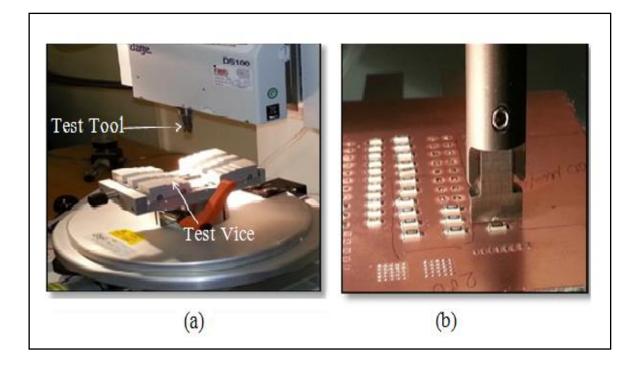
(a) Shear tool/sample holder (b) Shear testing position.
